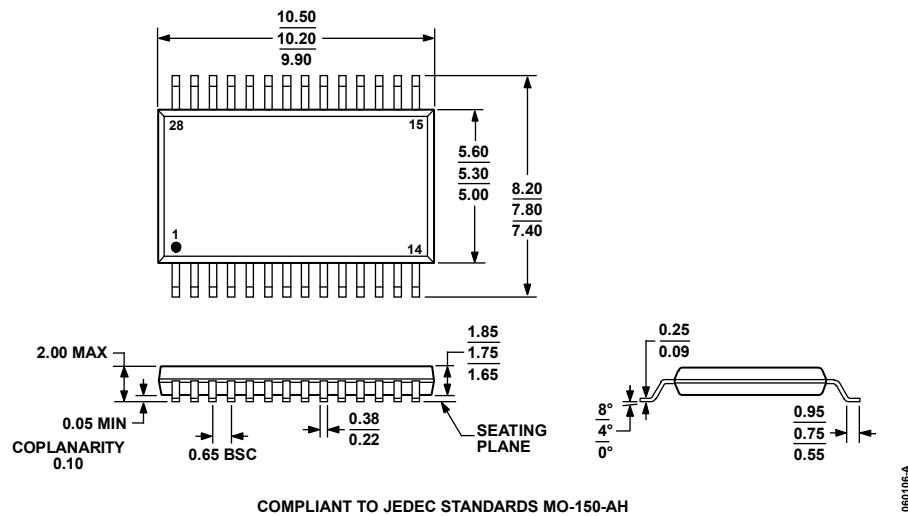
28-Lead Shrink Small Outline Package [SSOP]
